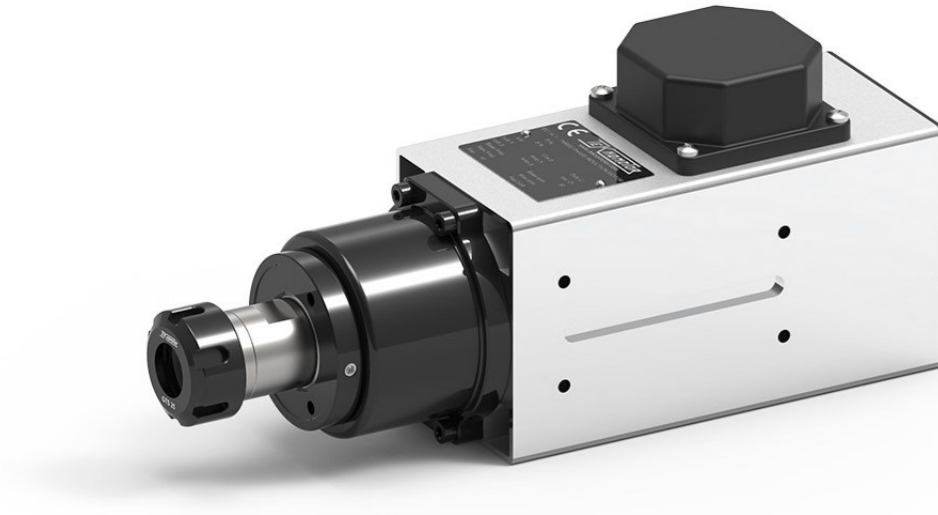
High-speed tool spindle drive Teknomotor 4147-A-DB-P-ER25-RH
